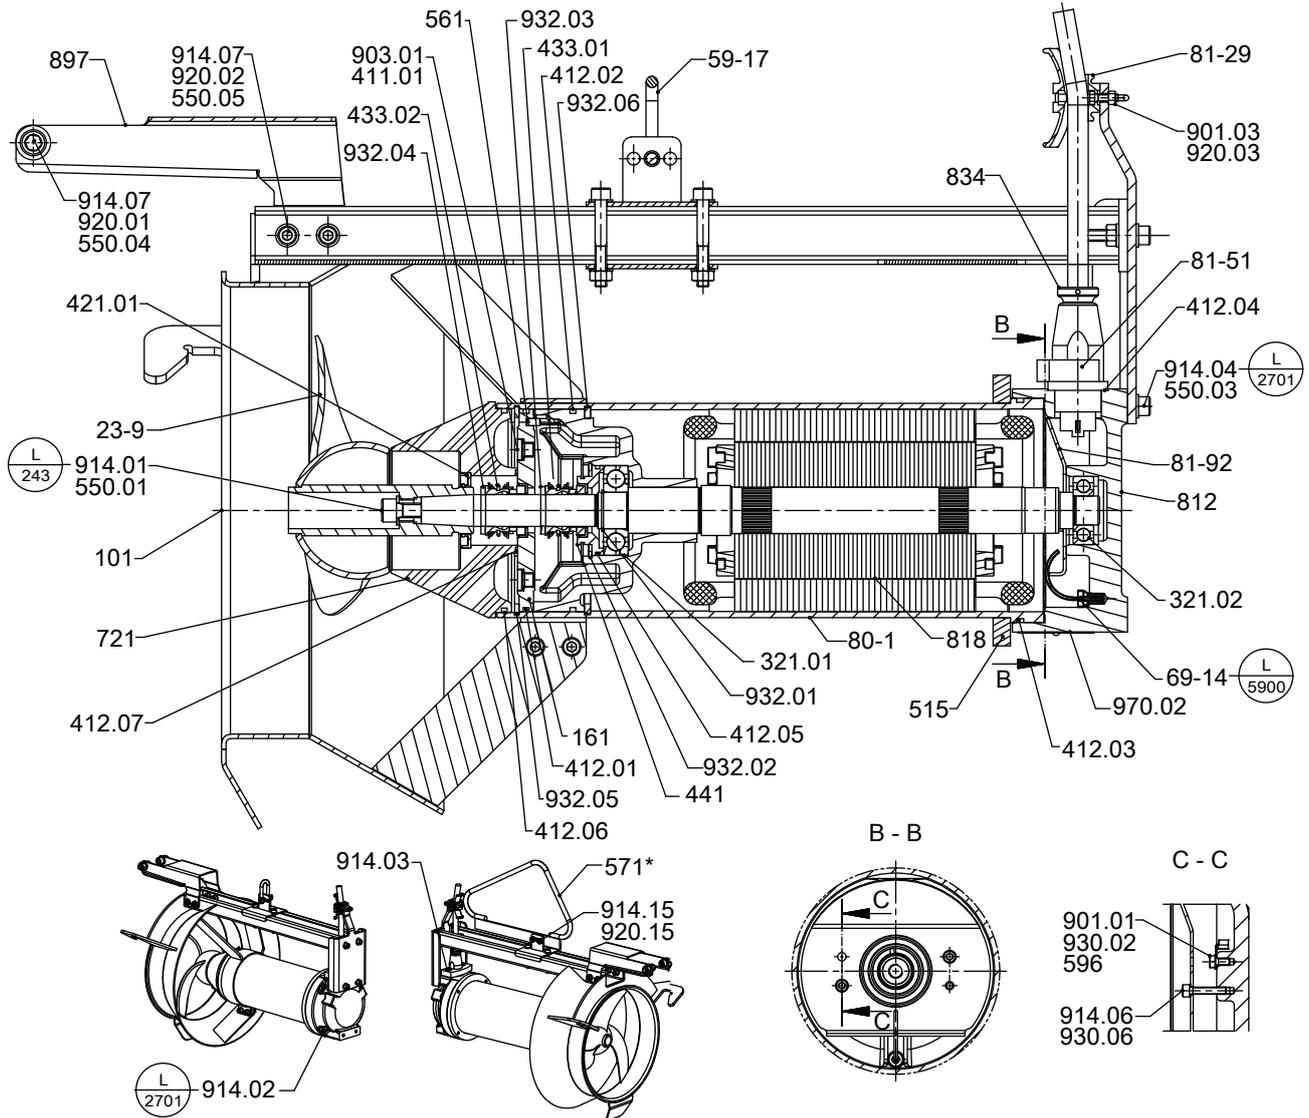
General assembly drawing: a) with shackle b) with bail (optional)
